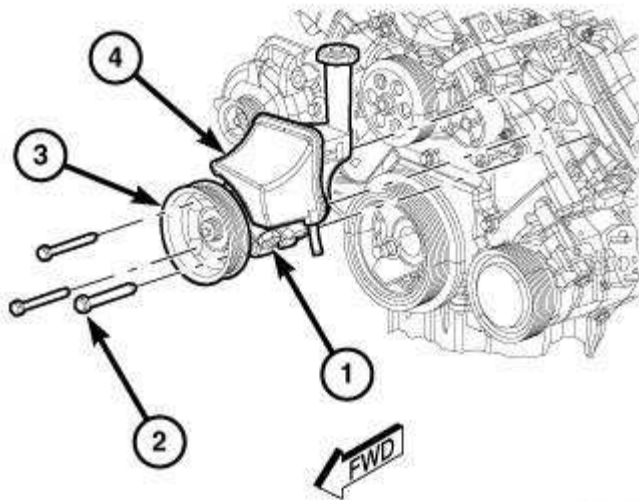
Power Steering Reservoir, Pump, Pulley & Bolts
